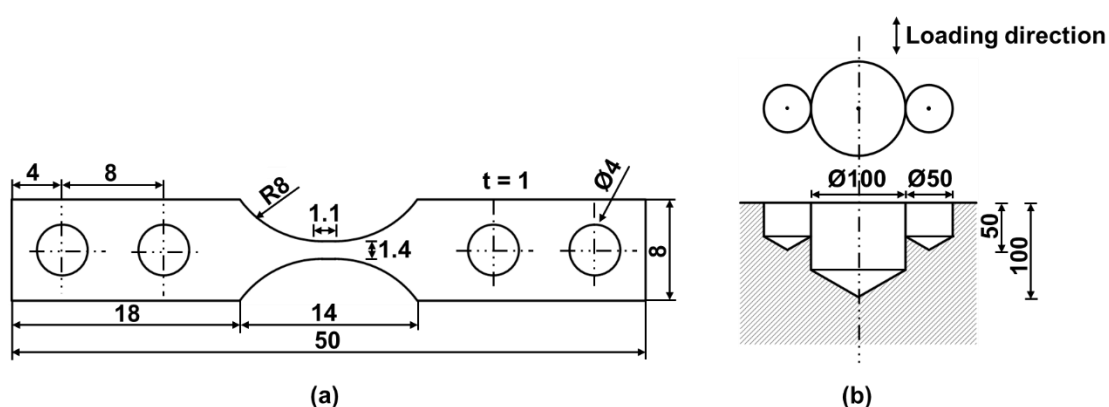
(a) Specimen geometry for rotating bending test (all dimensions in mm), (b) artificial defect geometry for short crack (all dimensions in μm).
